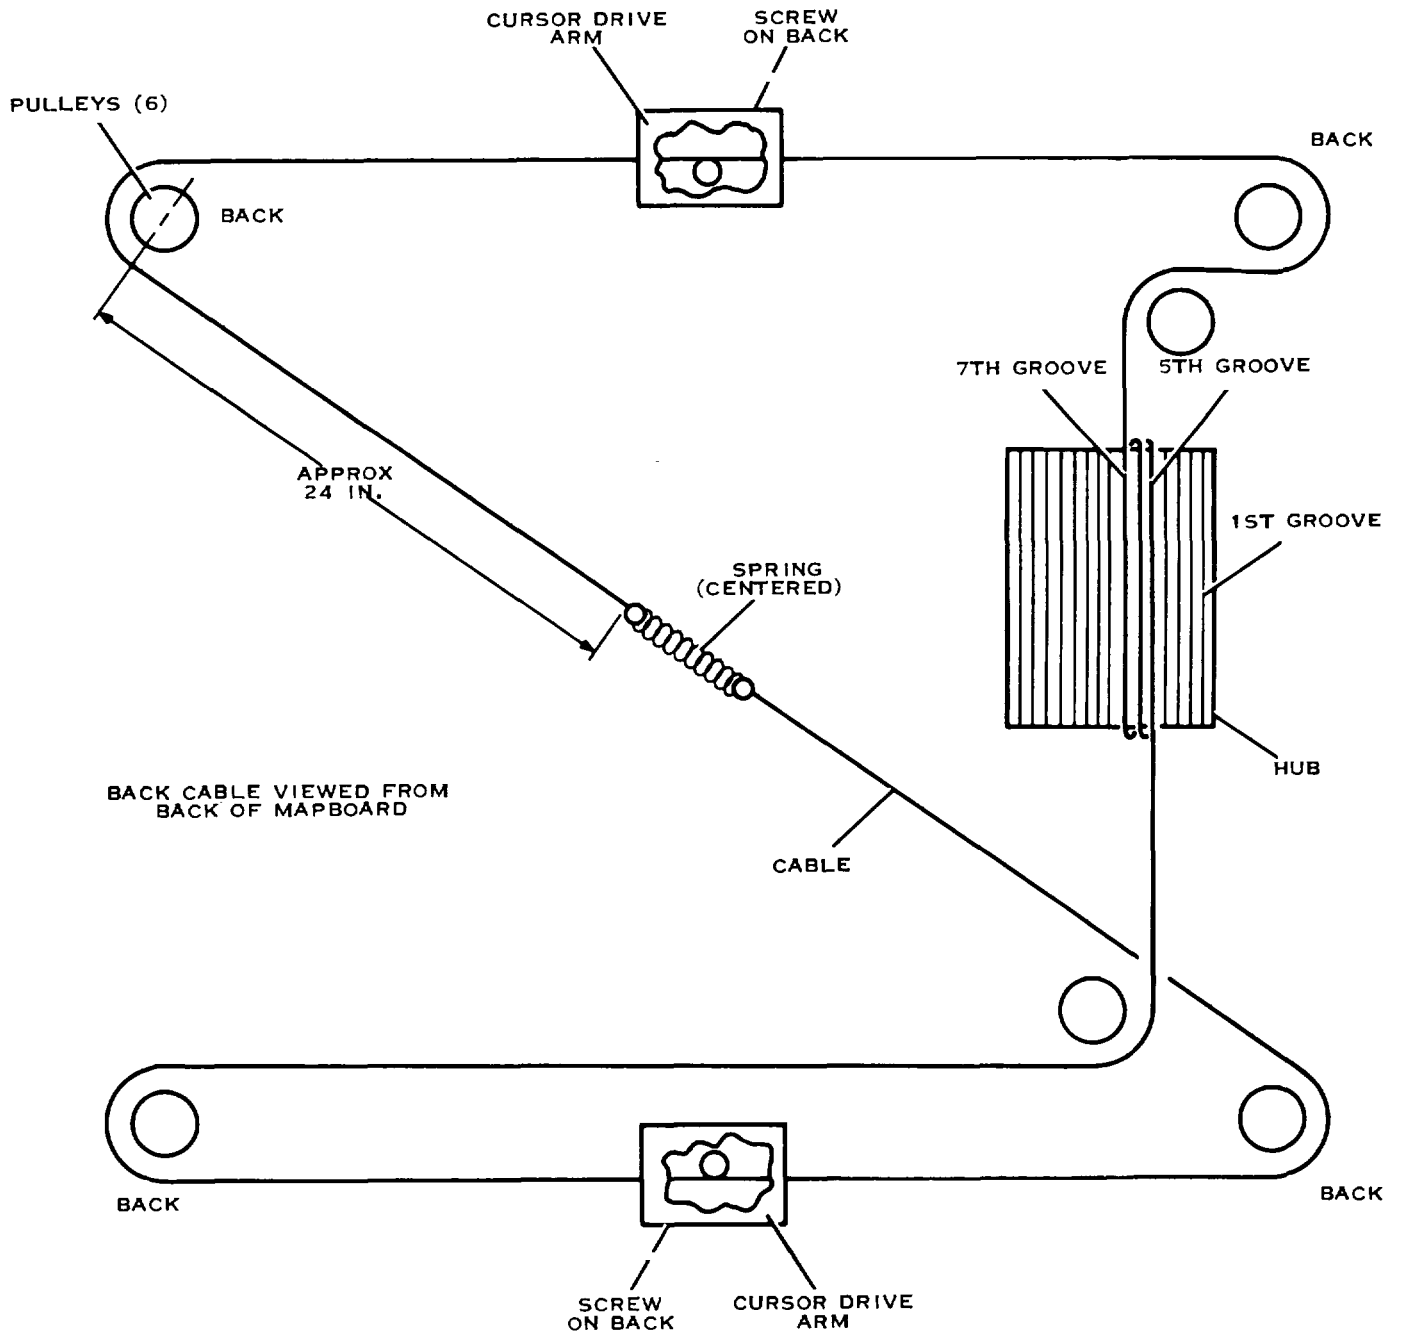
Mapboard Cable Threading Diagram (Sheet 2 of 2)
